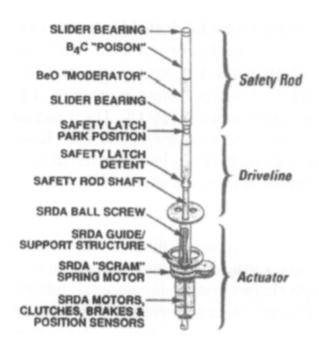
SP-100 Safety Rod Drive Assembly (Anderson et al., 1983)
